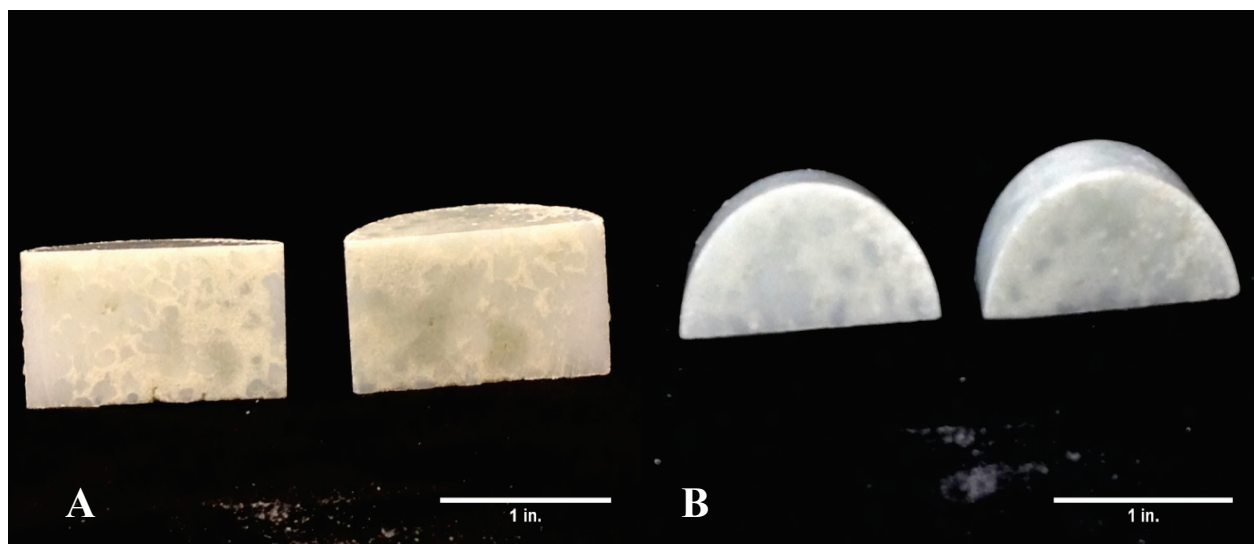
(A) Inner face (left) and top and bottom face (B) of a PBX Specimen manufactured with the finalized manufacturing process.
